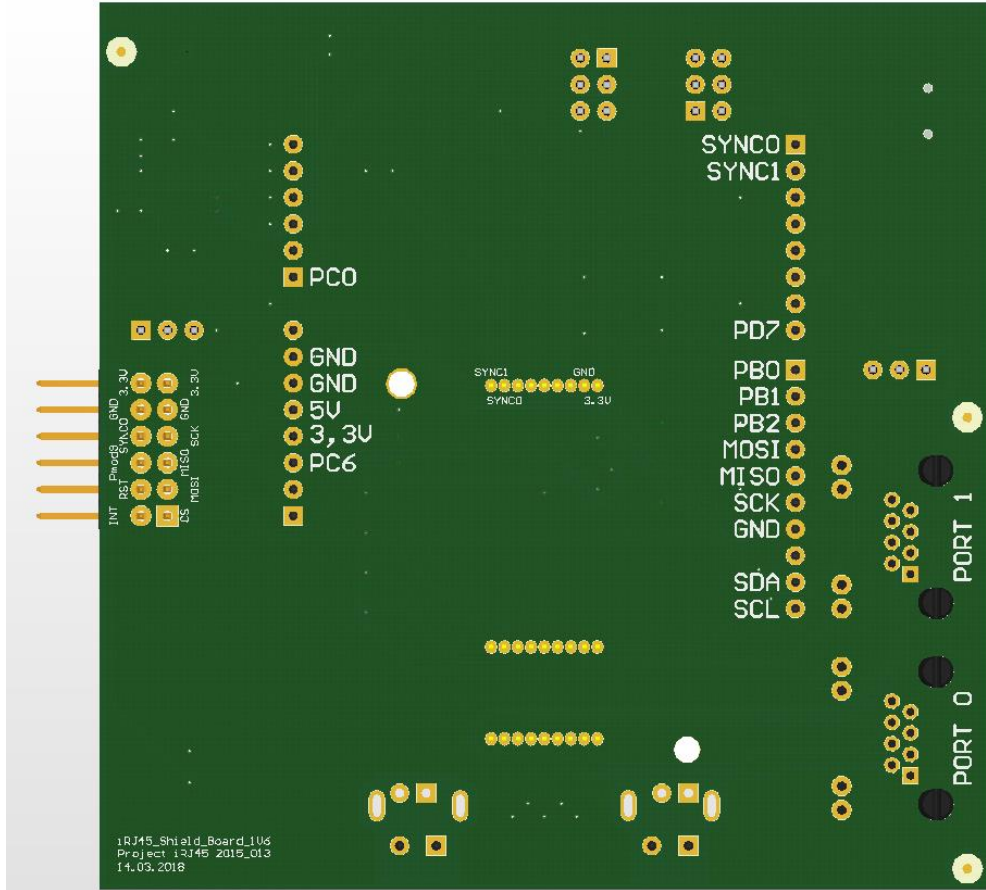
Bottom view Adapter_ARDUINO/PMOD
